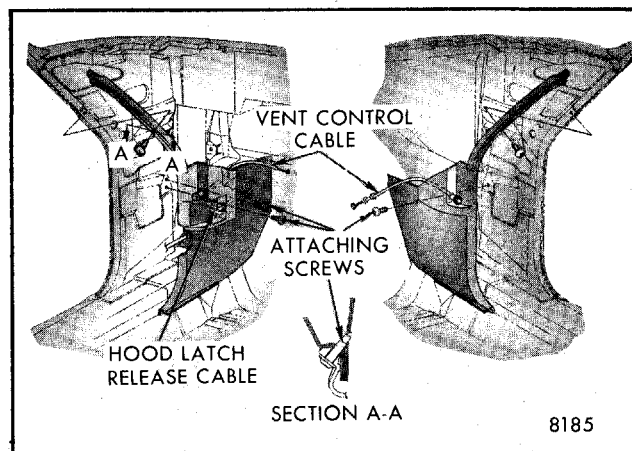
Shroud Side Finishing Panel - "E" Styles ("A" Styles Similar)
